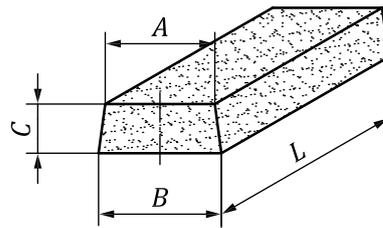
Grinding segment, trapezoidal shape (Type 31G)
